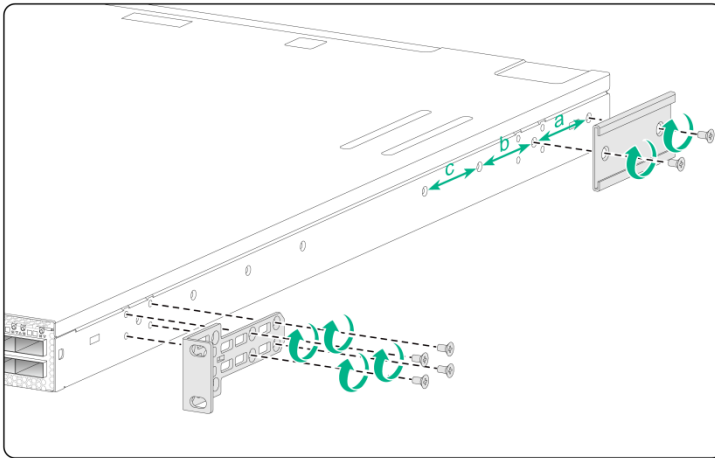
Attaching the mounting brackets and chassis rails to the S9855-48CD8D/S9855-24B8DF/S9855-32D switch (power supply-side mounting position for the mounting brackets)
